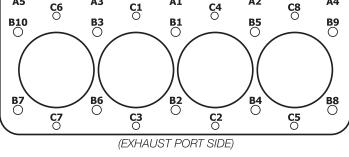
Cylinder Head Bolt Torque Sequence
